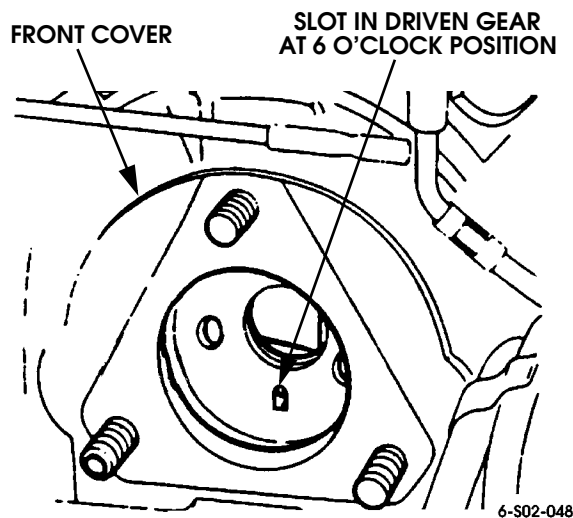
Checking Injection Pump Driven Gear Slot Position
